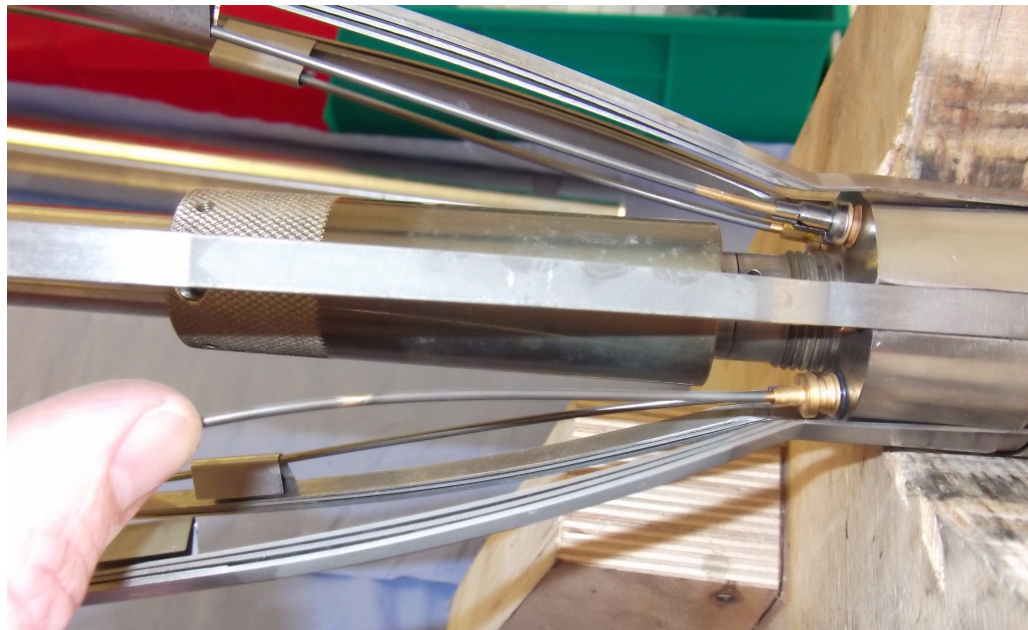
The Sensor Assembly fitted to the Sensor Head
